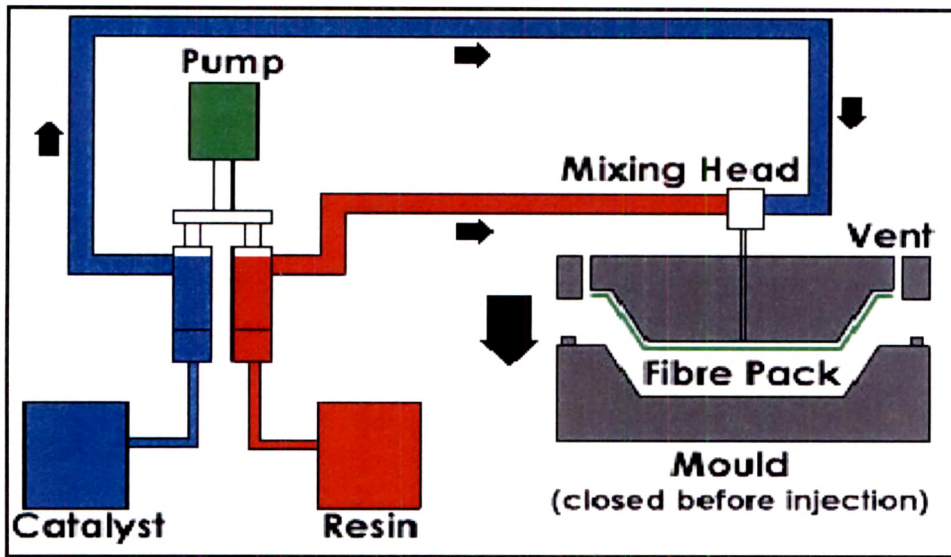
Liquid Moulding of a Thermoset Resin
